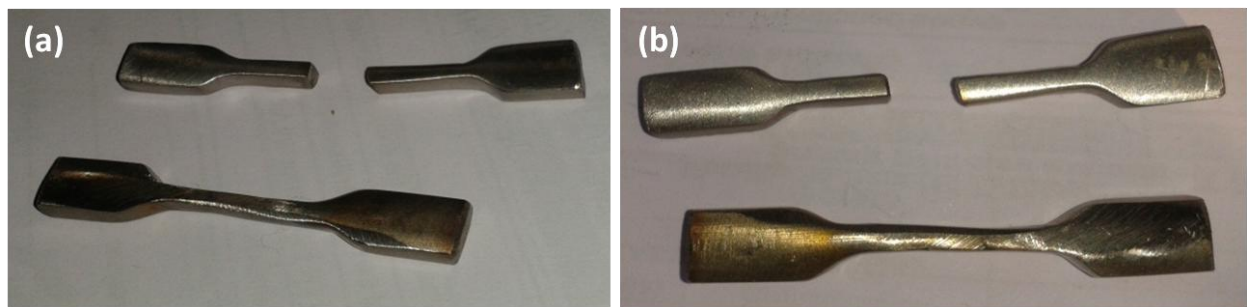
Tensile tested SS-316 specimens (a) Microwave processed and (b) TIG welded
